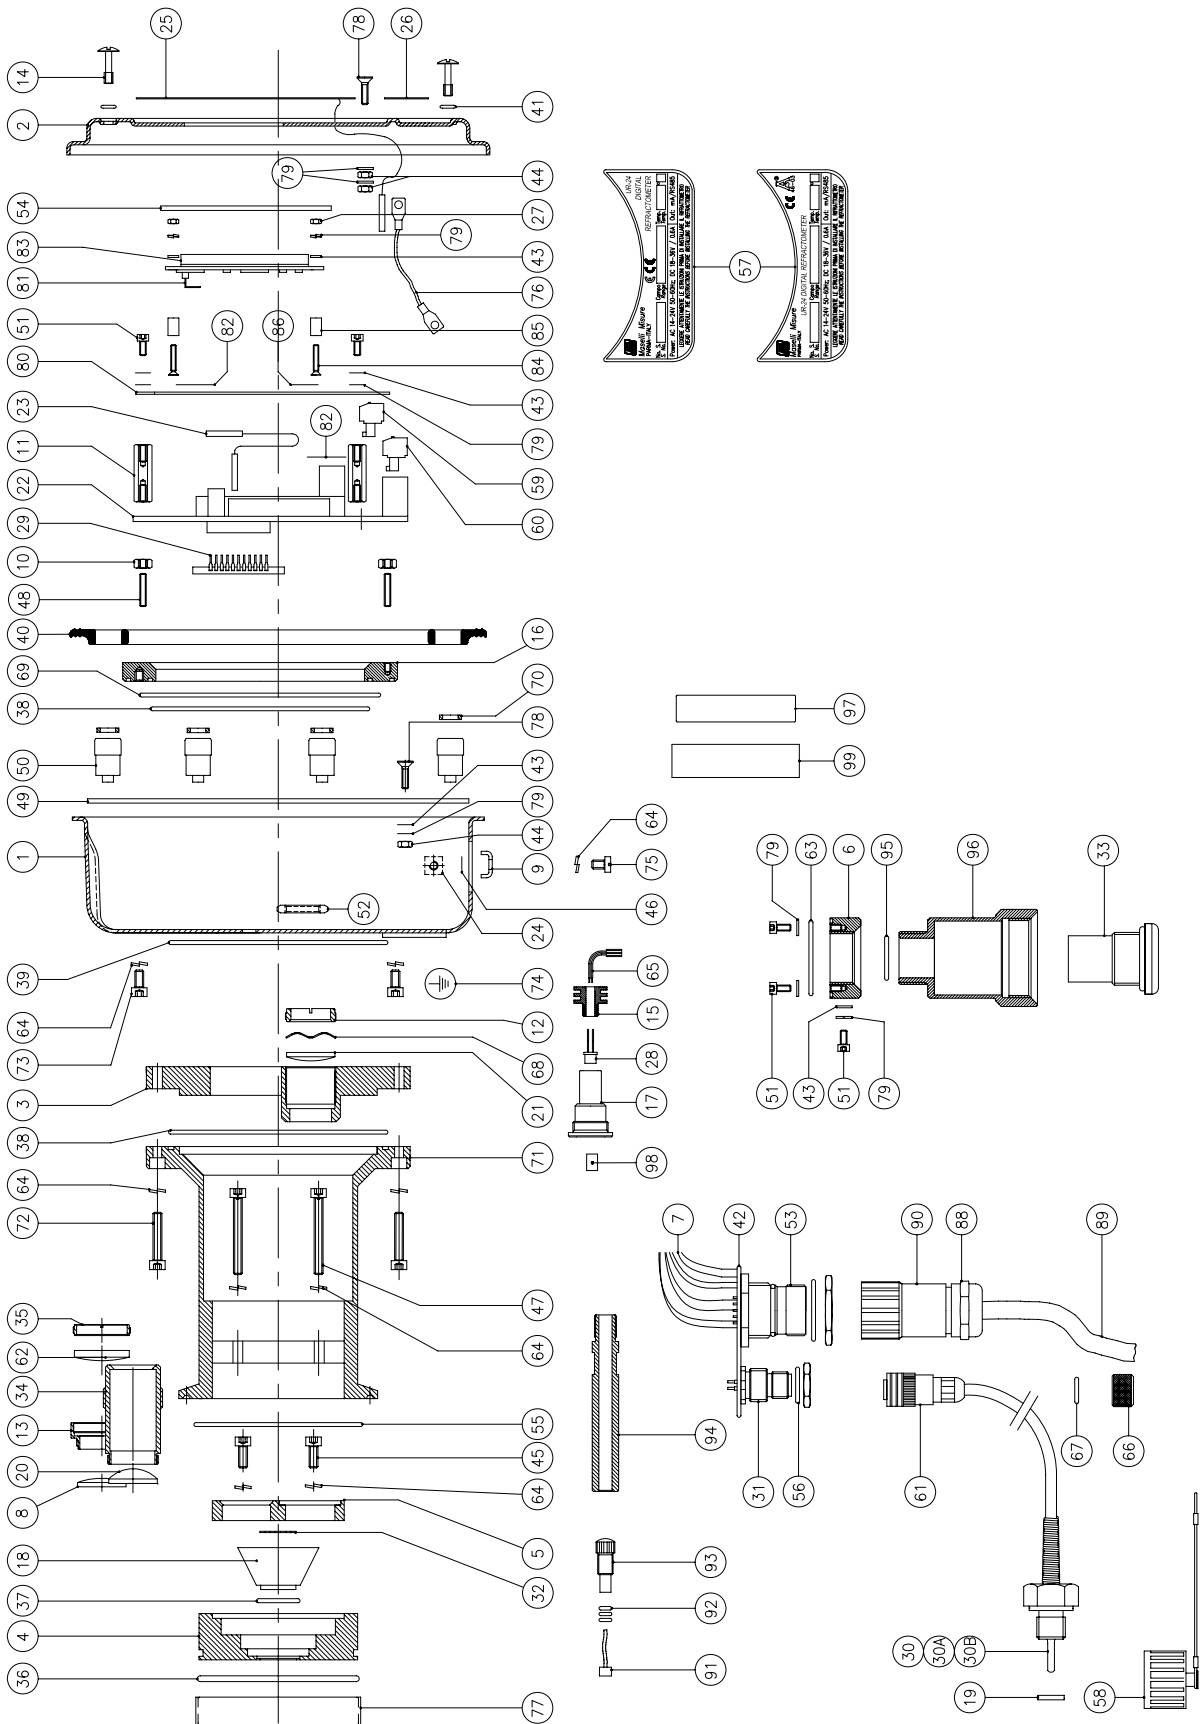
b – Exploded view of UR-24 LP Digital Refractometer
